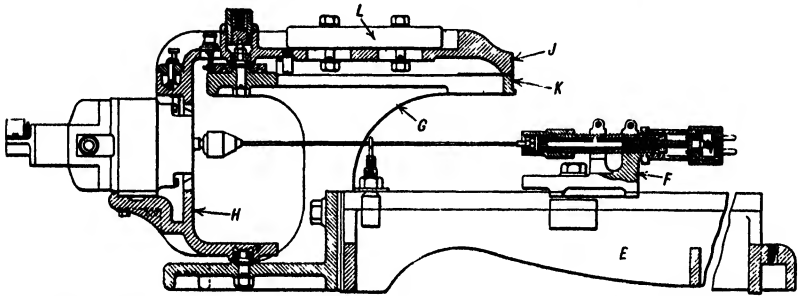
THE HAIGH-ROBERTSON WIRE FATIGUE TESTING MACHINE
